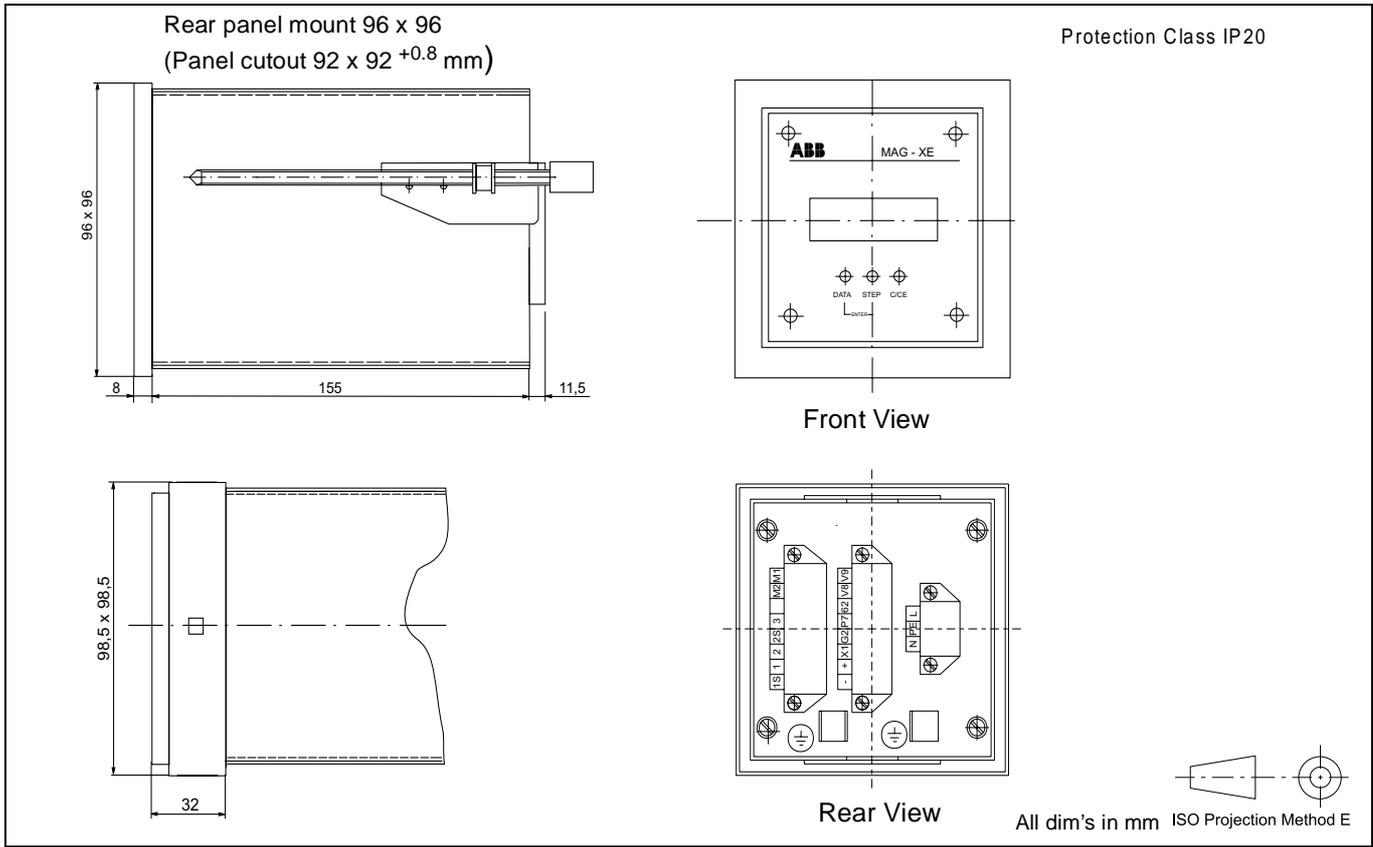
Dimensions, Converter E4 in Rear Panel Mount Housing for Operation with Flowmeter Primary Models DE46, DE26
